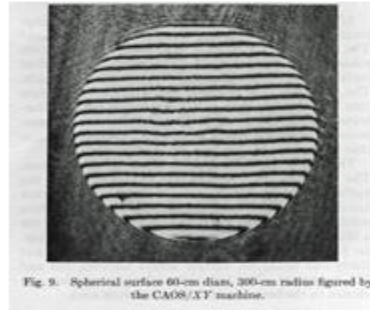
Spherical surface 60-cm diam, 300-cm radius figured by the CAOS/XY machine.
